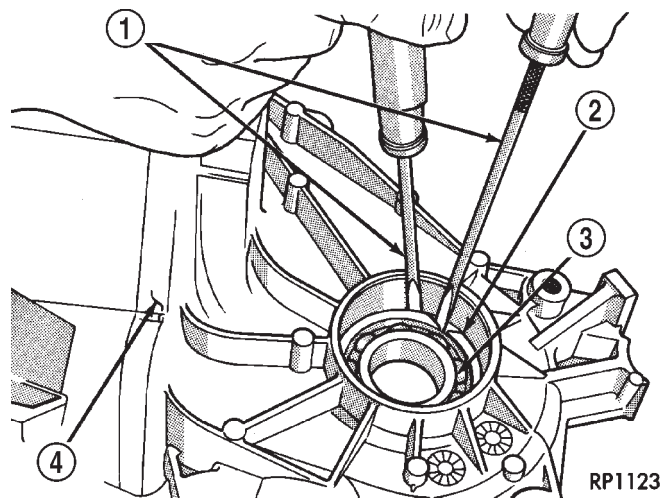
Front Output Shaft Bearing Retaining Ring Removal
